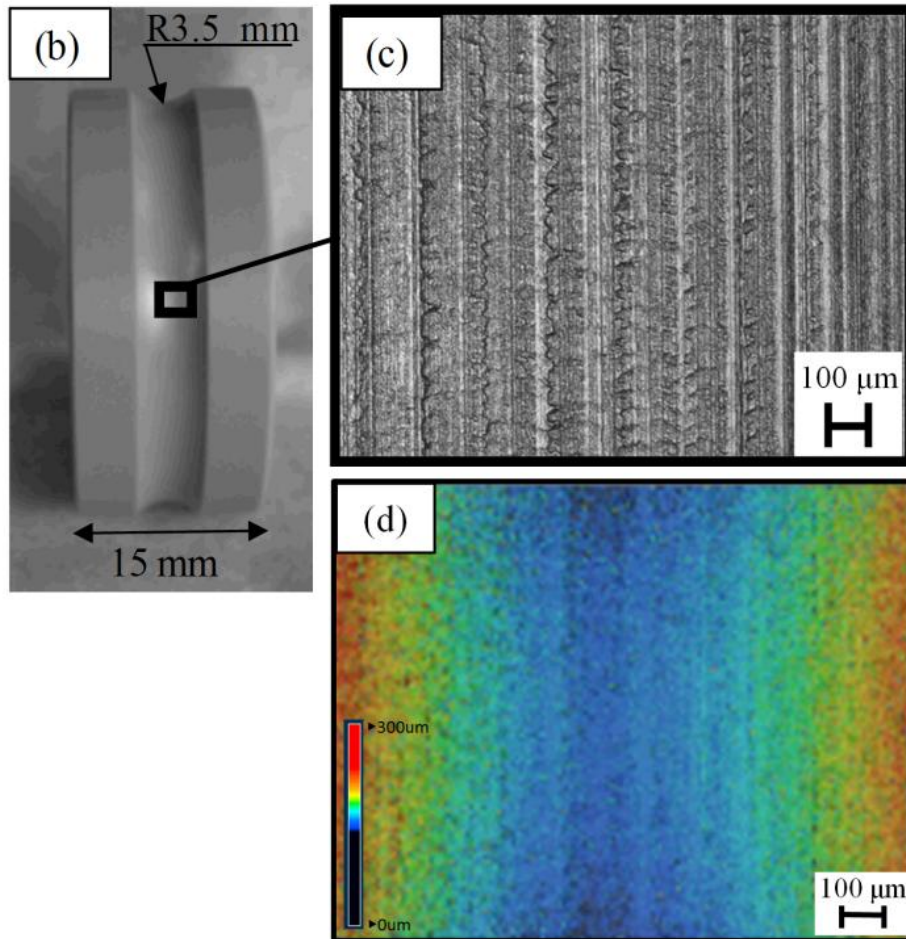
(b) Bearing's inner ring prior to test: 15 mm width.
